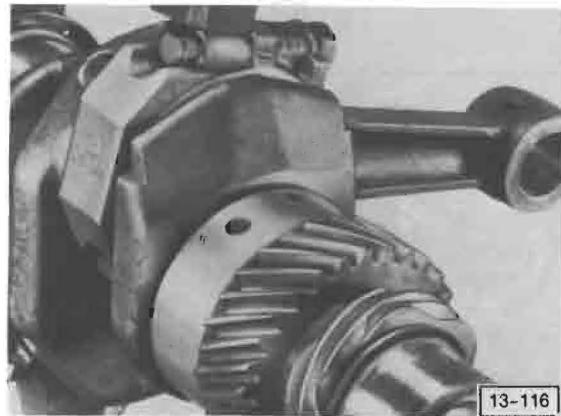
Mark matching connecting rod/bearing cover with cylinder
